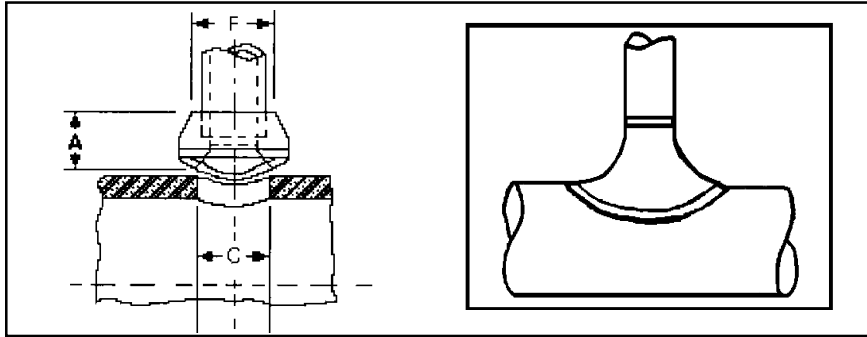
Manufacturer's proprietary designs for pipe weld reinforcement fittings that could be used to strengthen lube oil supply lines at locations away from the gearbox casing.
